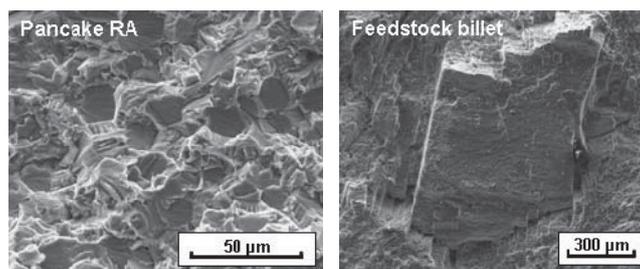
Fracture surface of pancake RA (l) and feedstock billet (r);  $R = 0$
